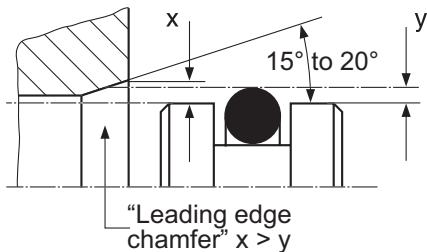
The diagram shows the leading edge chamfer and an O-ring before deformation. The dimension X should be greater than dimension Y to ensure a trouble-free assembly operation
